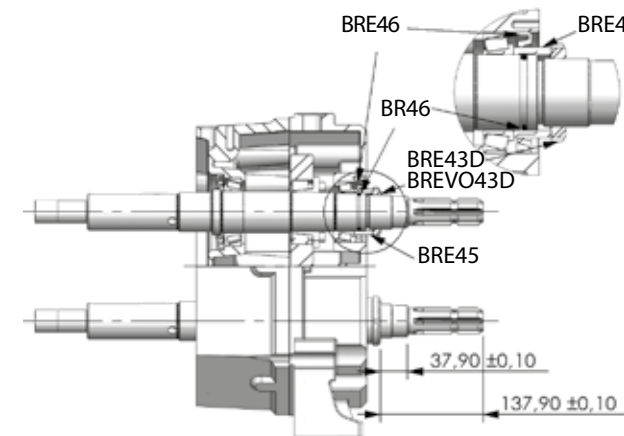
Assembly of gearcase (step 3) and measures to preload the bearings (Version D).
